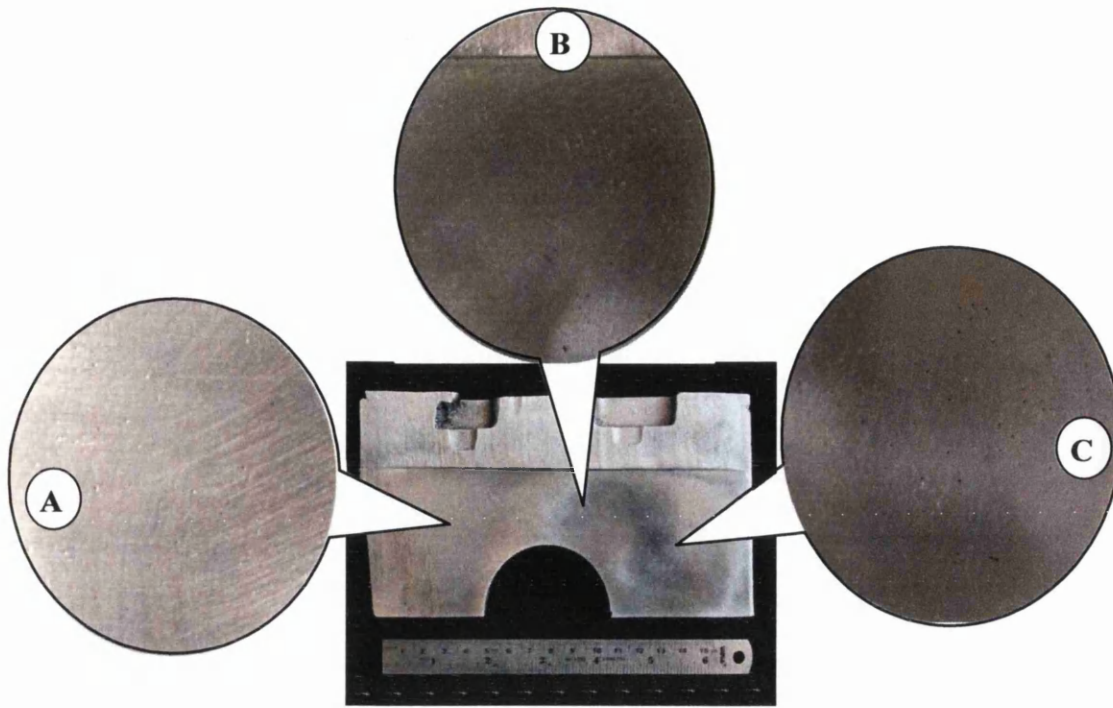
Photograph of Aluminium sand casting showing its dimension and locations of porosity formation
